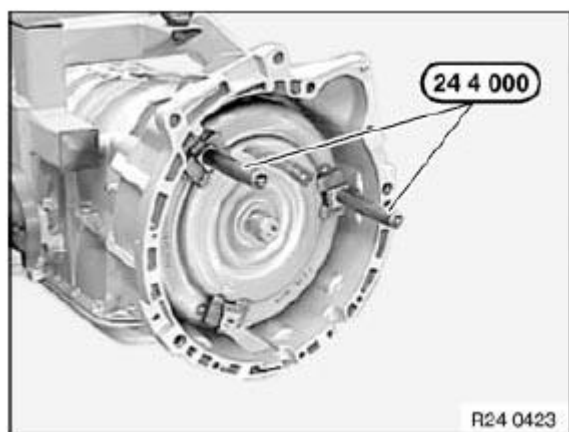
Identifying Special Tool 24 4 000 Into Torque Converter
